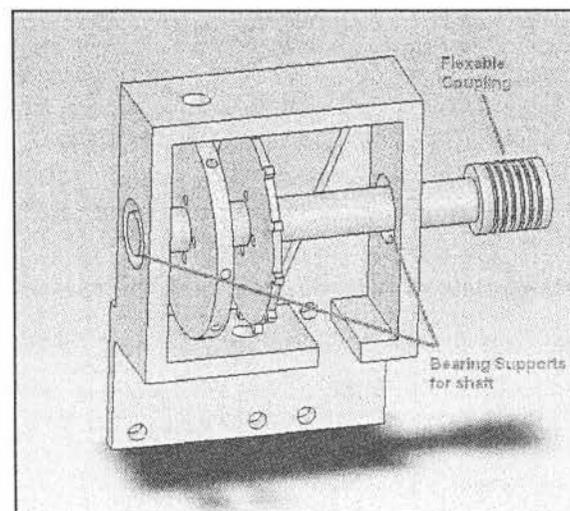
New Timing disk assembly with flexible coupling and bearings
